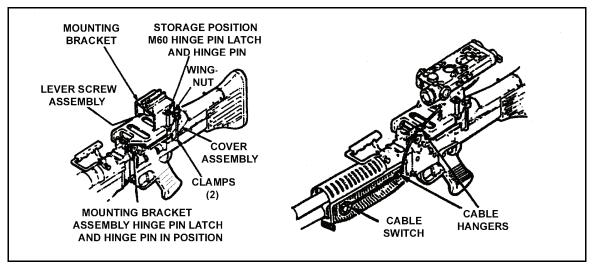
Mounting of the AN/PEQ-2A to the M60 machine gun.
